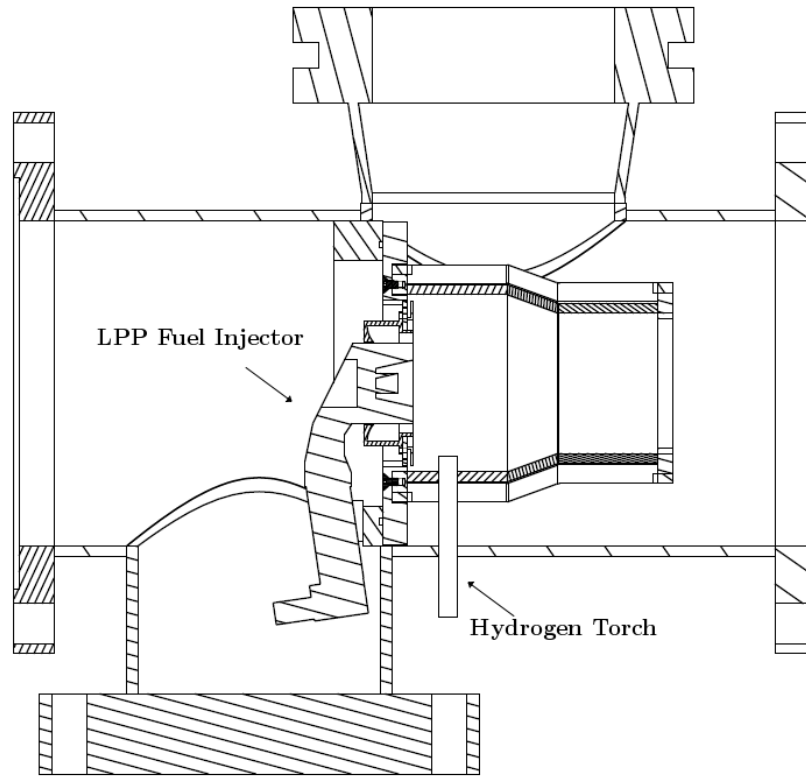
Improved hydrogen torch ignition source mounted in the bottom panel of the rectangular flame tube.
